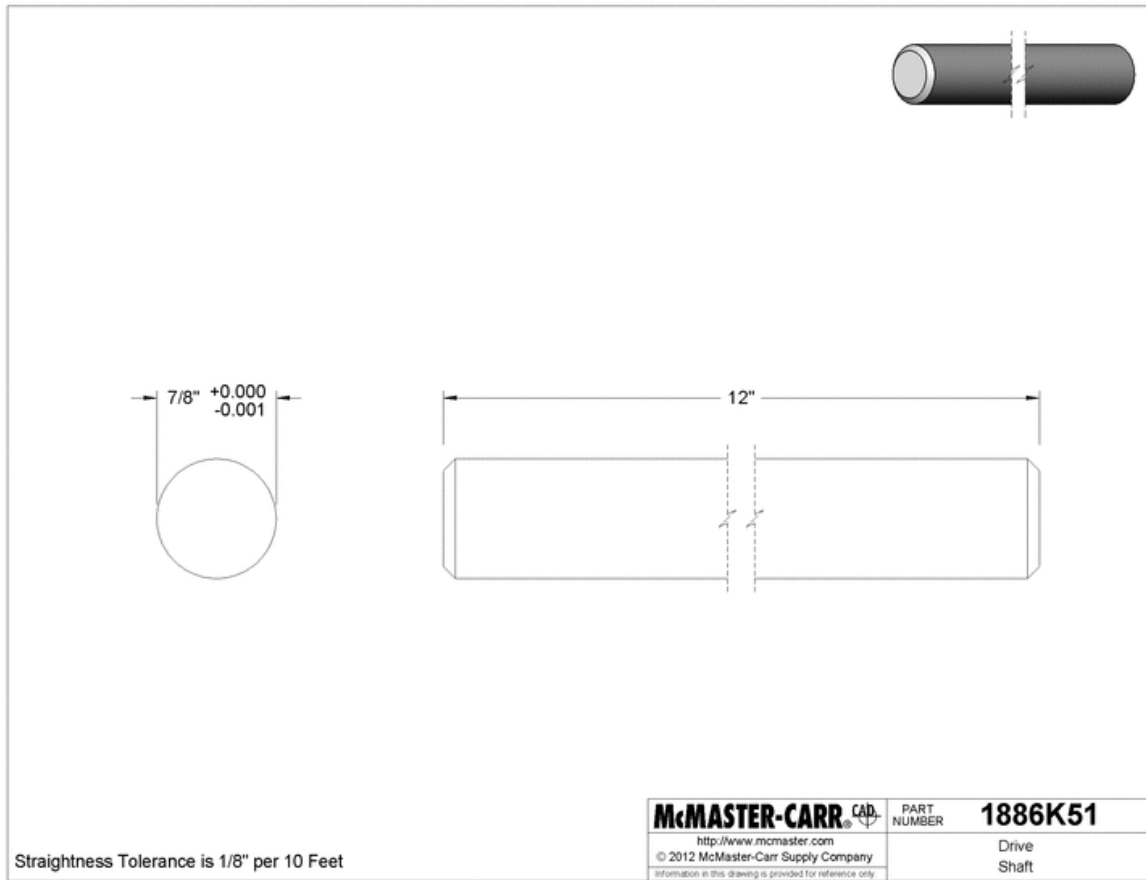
McMASTER-CARR Drive Shaft #1886K51
